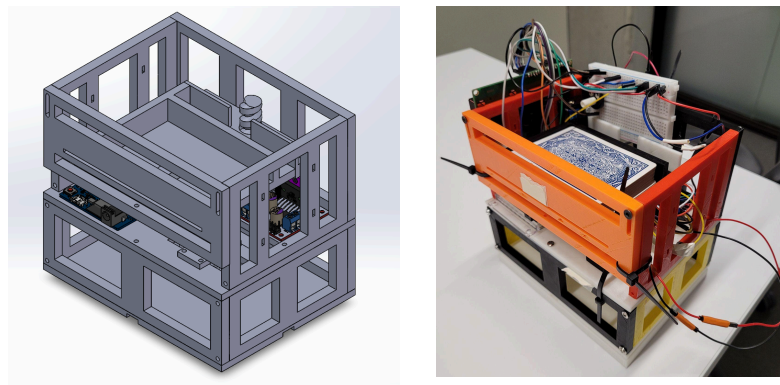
Full CAD of KIRBY (left) and completed assembly of KIRBY (right).
